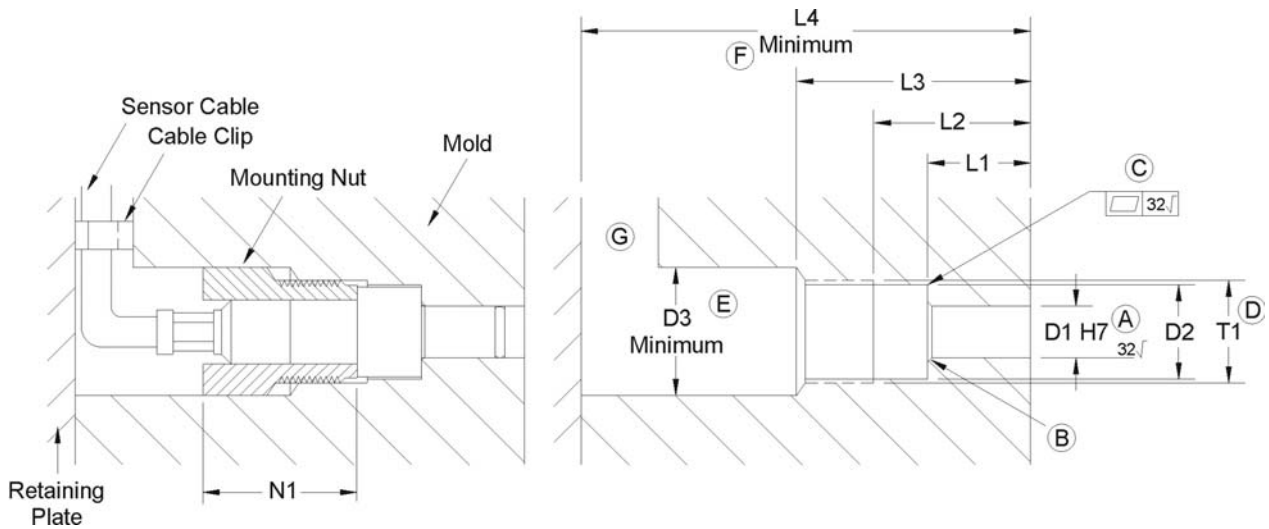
outlines the dimensions for attaching the Lynx Connector to the mold. The length of the Flush Mount sensor is measured from the bottom of the connector box to the end of the sensor as shown in Figure 5 on page 6. The sensors' standard lengths are also listed on page 6.
